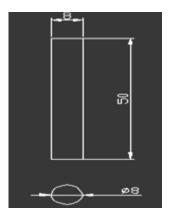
Sketch of pin (specimen) used for pin-on-disc wear test
